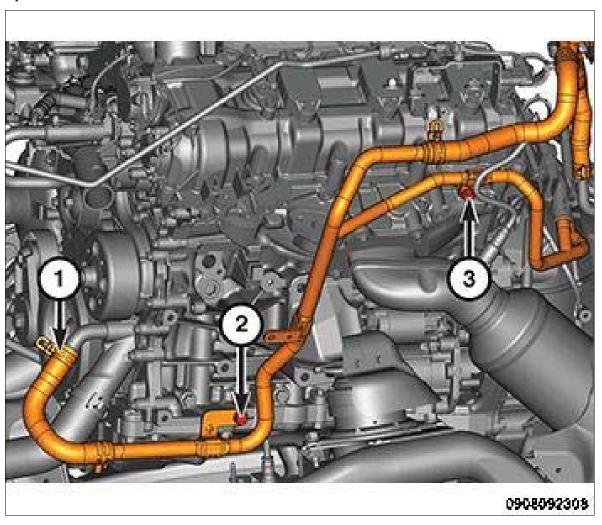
Heater Inlet Hose At Coolant Crossover & Heater Inlet Tube Assembly
